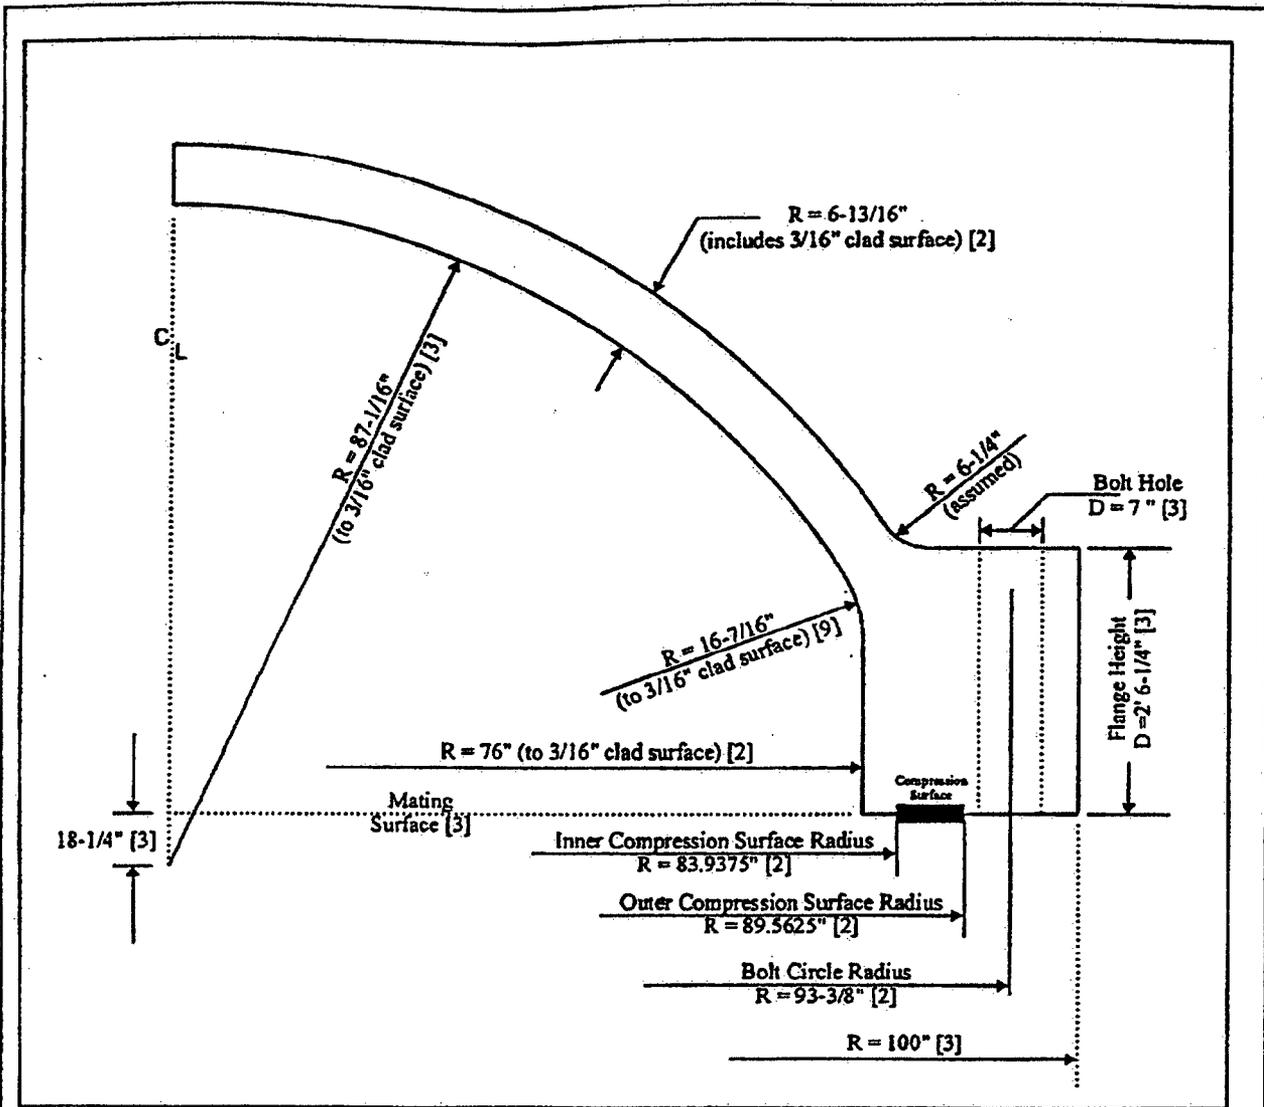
Top Hemispherical Head / Closure Flange Dimensions
